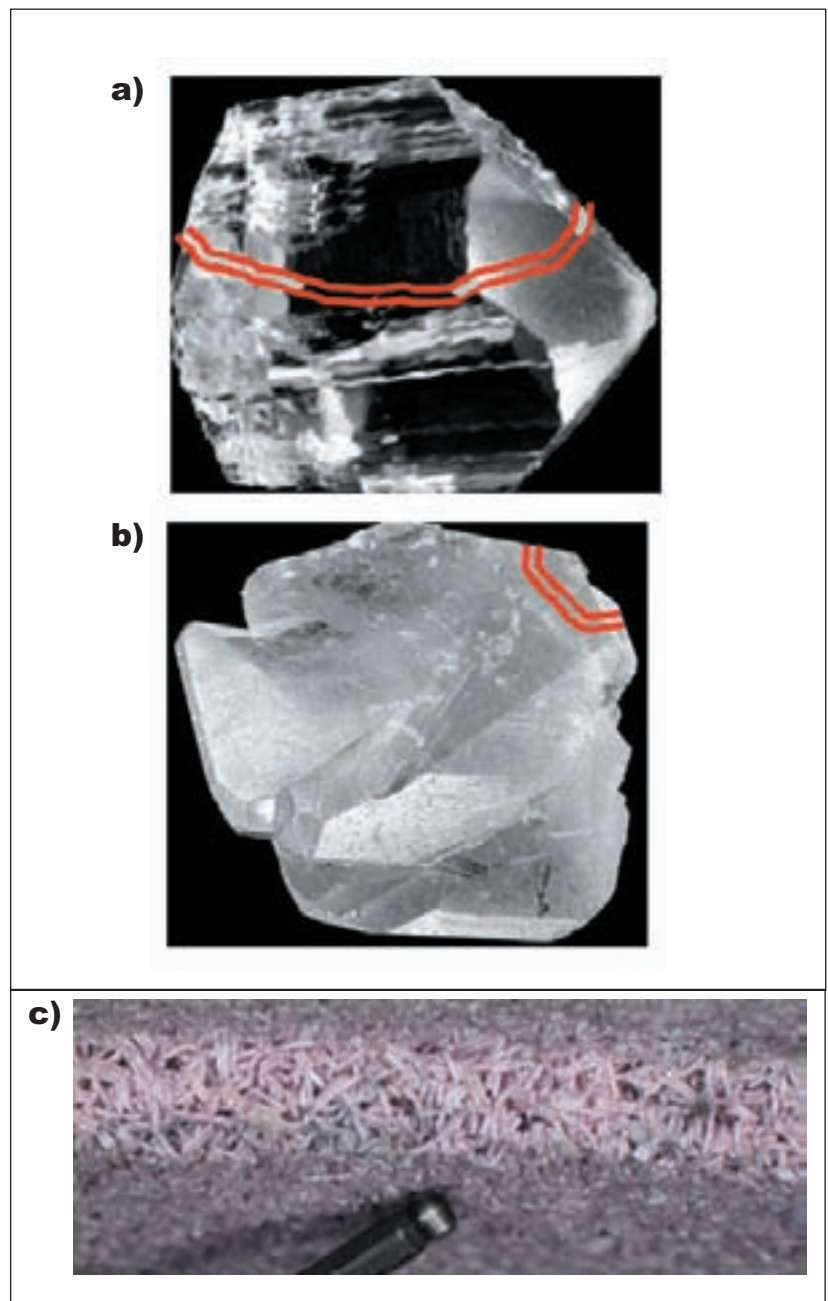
a) conventional aluminum oxide grain; b) SG sintered aluminum grain; c) ZG grinding wheel structure with worm shaped grains.
